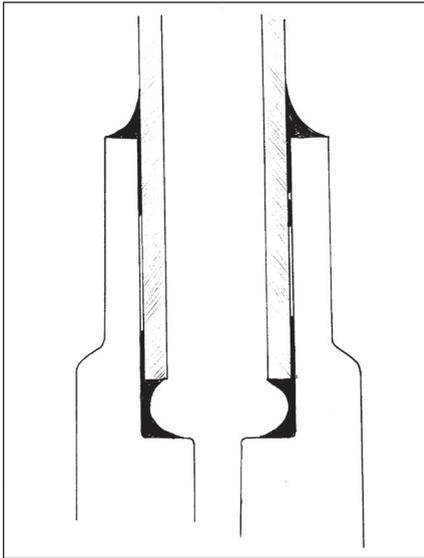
Cross section of a 6061 tube brazed into a 6061 fitting using AWS BAlSi-4 (4047) brazing filler metal. The excessive overlap prevented the filler metal from penetrating the full length of the joint.
